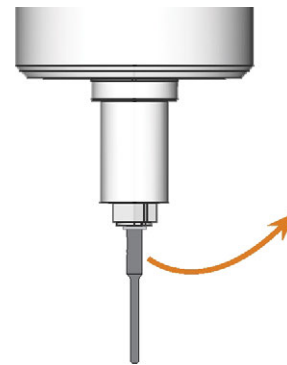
REMOVING THE TOOL FROM THE COLLET CHUCK
